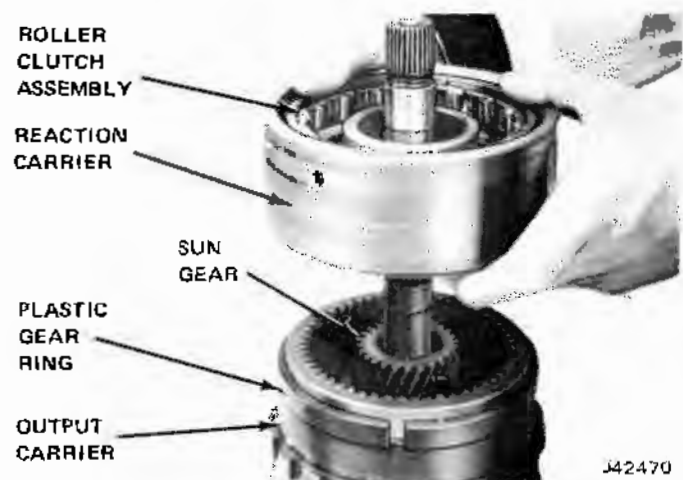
Removing Reaction Carrier and Roller From Output Carrier Clutch
